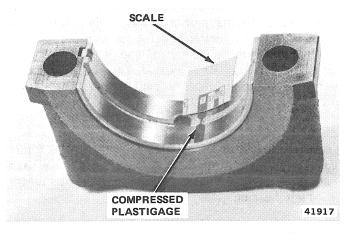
B-149 Measuring Main Bearing Clearance with Plastigage
